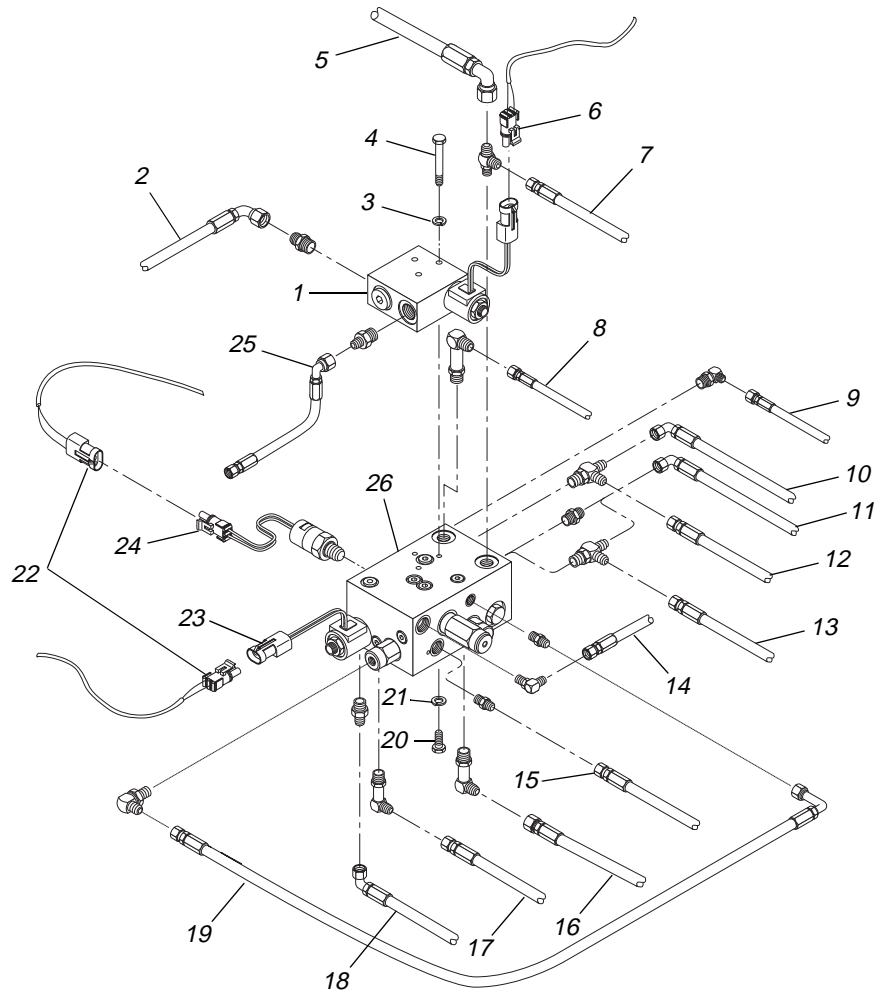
Rear Axle Stabilizer Control Valve Ports
